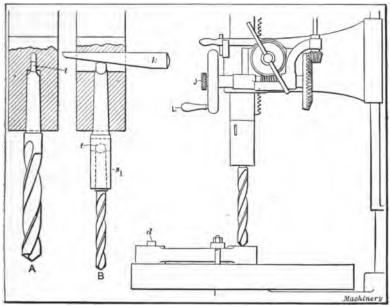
Method of Holding and Driving Taper-shank Drills.
